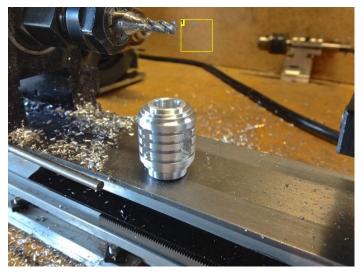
3/16" endmill held in a ER16 collet on the lathe.
